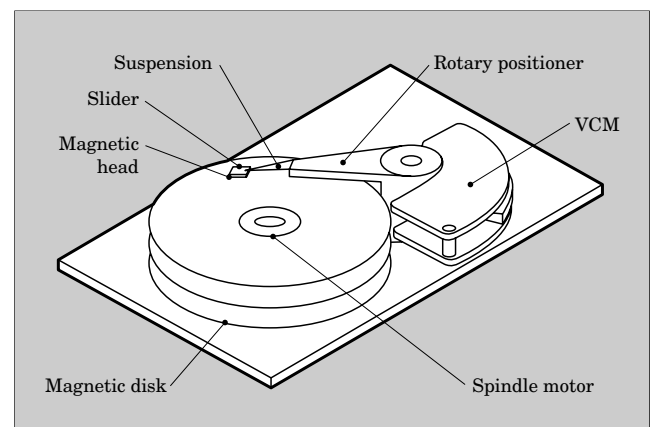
shows a schematic illustration of the structure of a magnetic head positioning mechanism in the HDD. The magnetic disk as a recording medium rotates at a high-speed of several thousand r/min by a spindle motor. When reading or writing data, the
